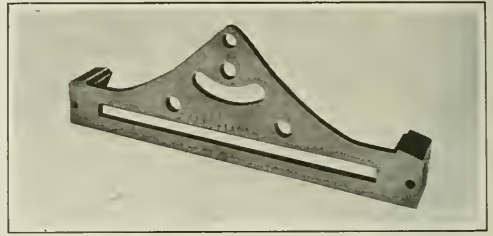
Two-stand Bracket for an X-ray Apparatus, also produced by Die-casting
